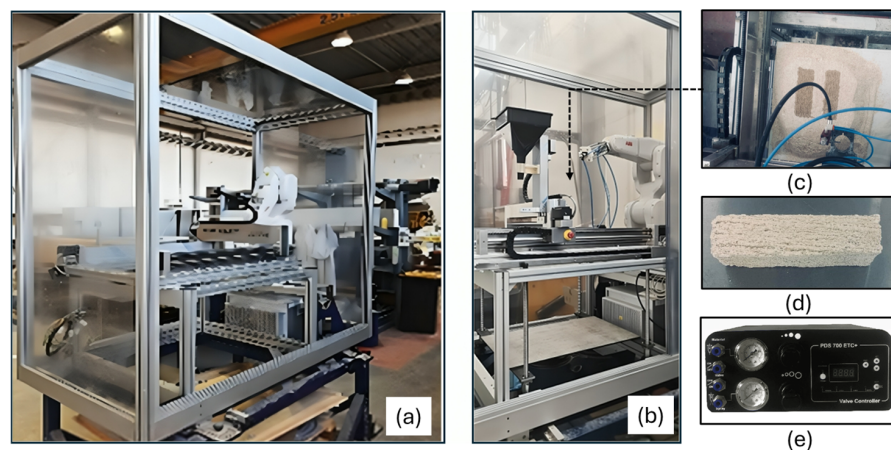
(a,b) Customized 3D printer setup; (c) printed green specimen; (d) printed specimen; (e) 700 ETC+ valve controller.
